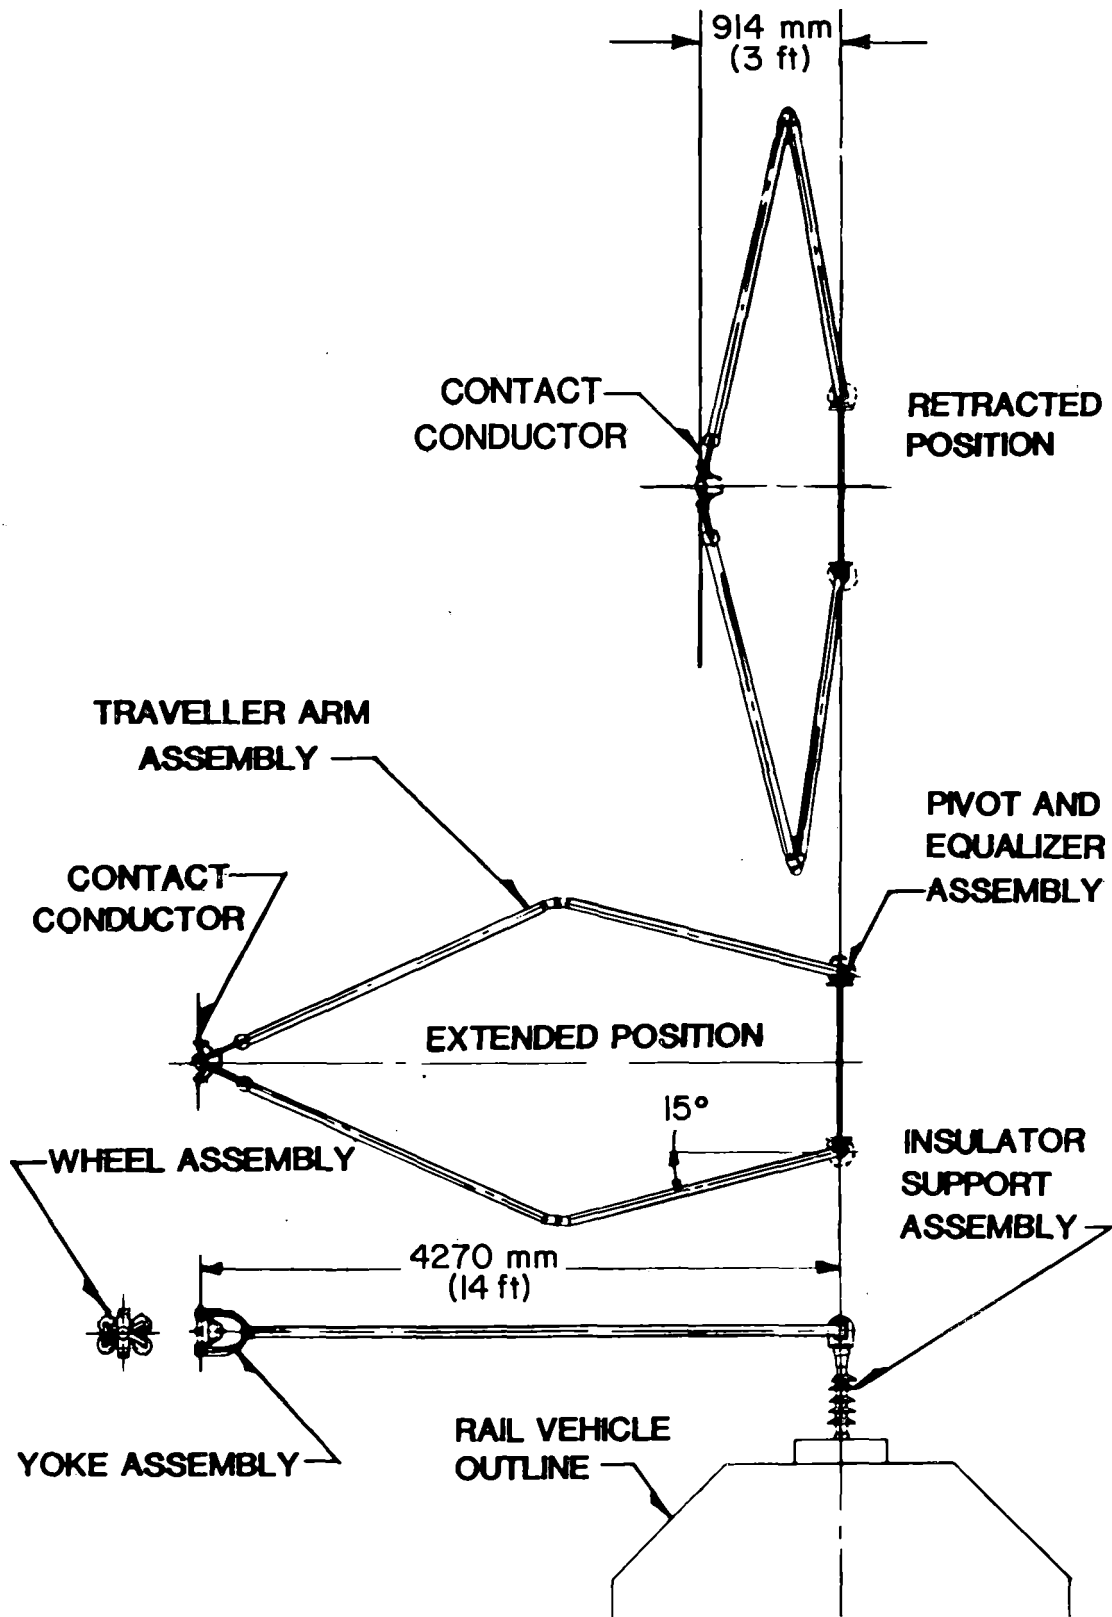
POSSIBLE ARM ARRANGEMENT FOR THE TRAVELLER ASSEMBLY (DIAMOND PANTOGRAPH).
